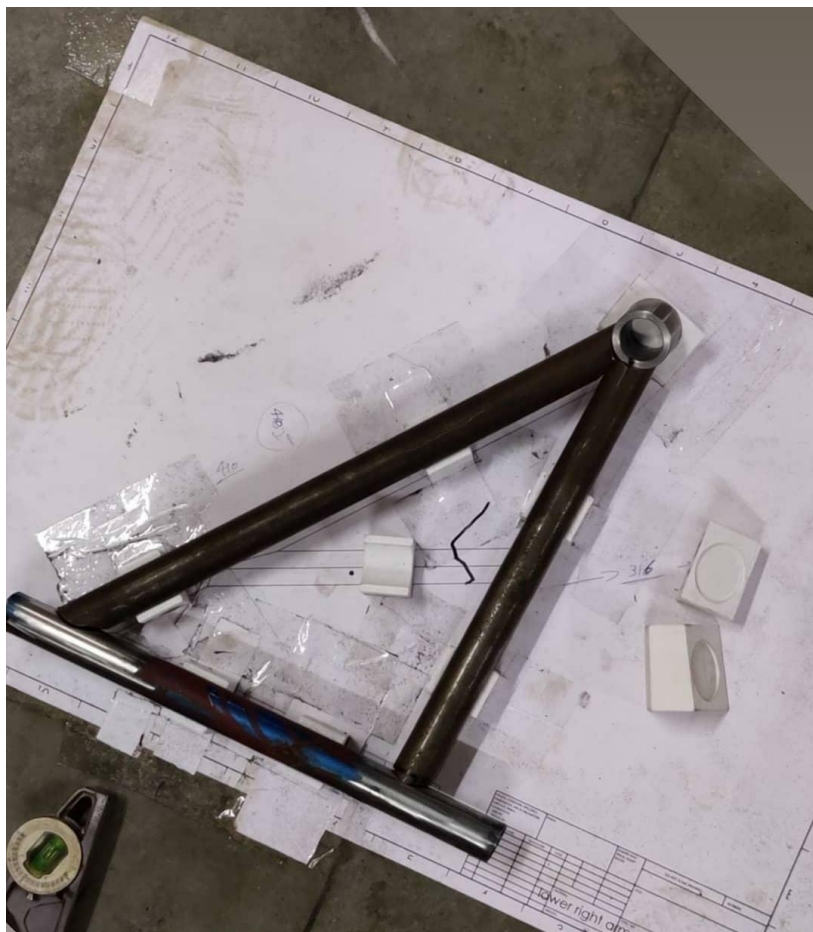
Manufacturing setup for primary suspension arm and spare manufacturing
